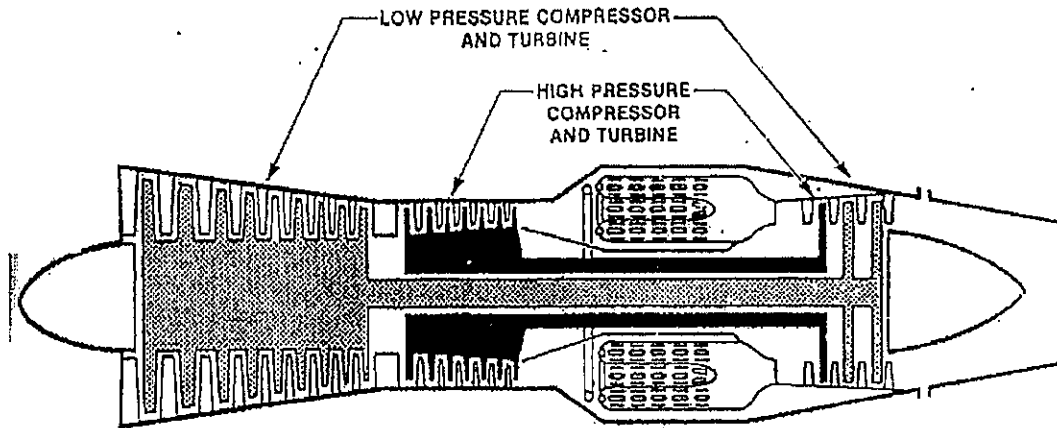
A-18 A dual-spool axial flow compressor is used in this engine.
